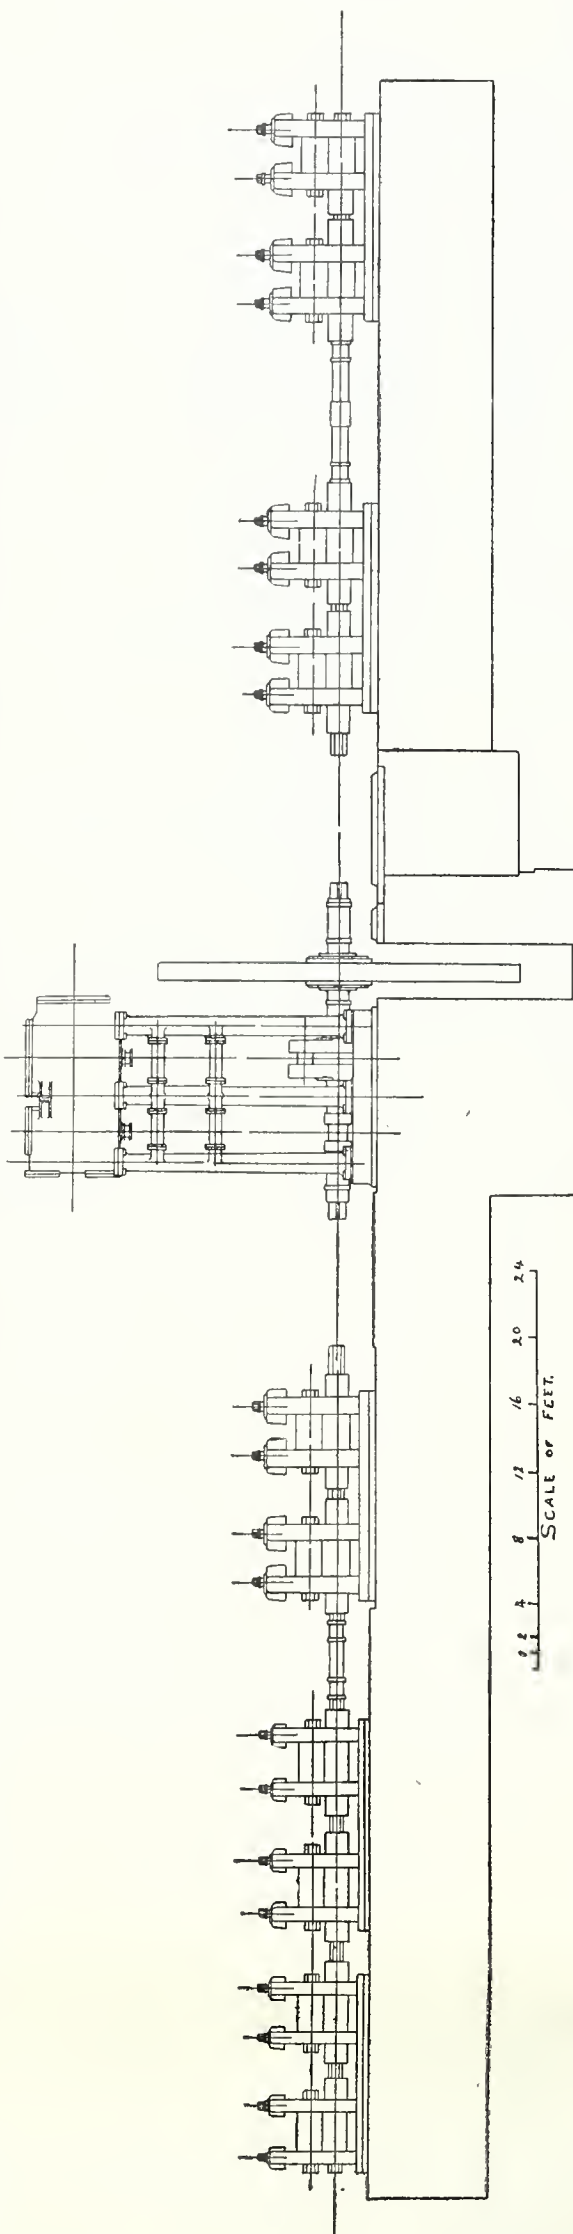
An English Tin Plate Rolling Mill Plant. Elevation.
